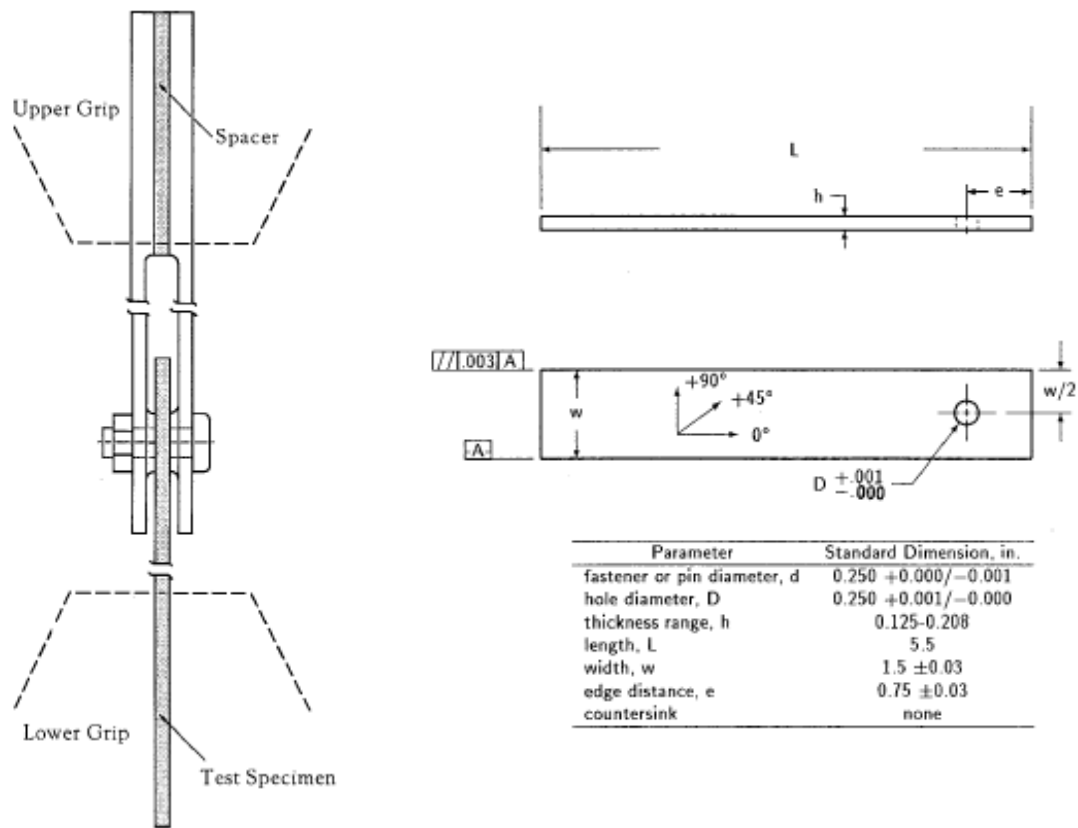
ASTM D6484 Test Support Fixture Assembly (left) and Open Hole Compression Test Specimen Geometry (right)<sup>23</sup>
